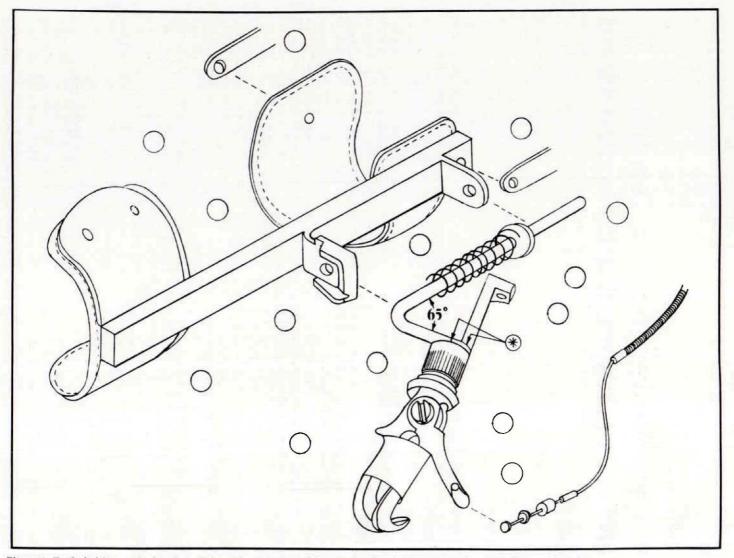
Exploded isometric drawing of the orthosis emphasizing the hand, rotating rod, and arm attachment assembly.
